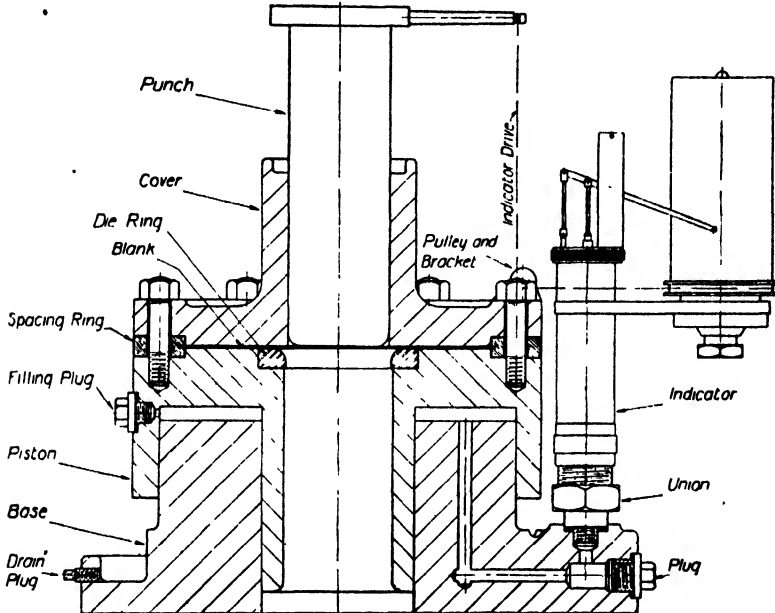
APPARATUS FOR DEEP DRAWING TEST RESEARCH
